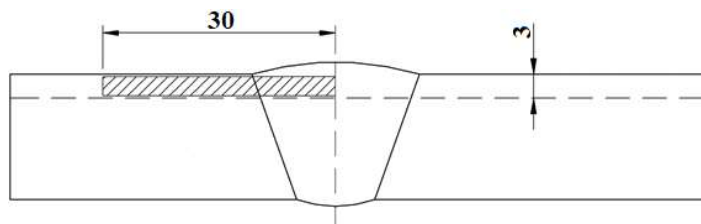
Cut out procedure of the corrosion test specimen.
